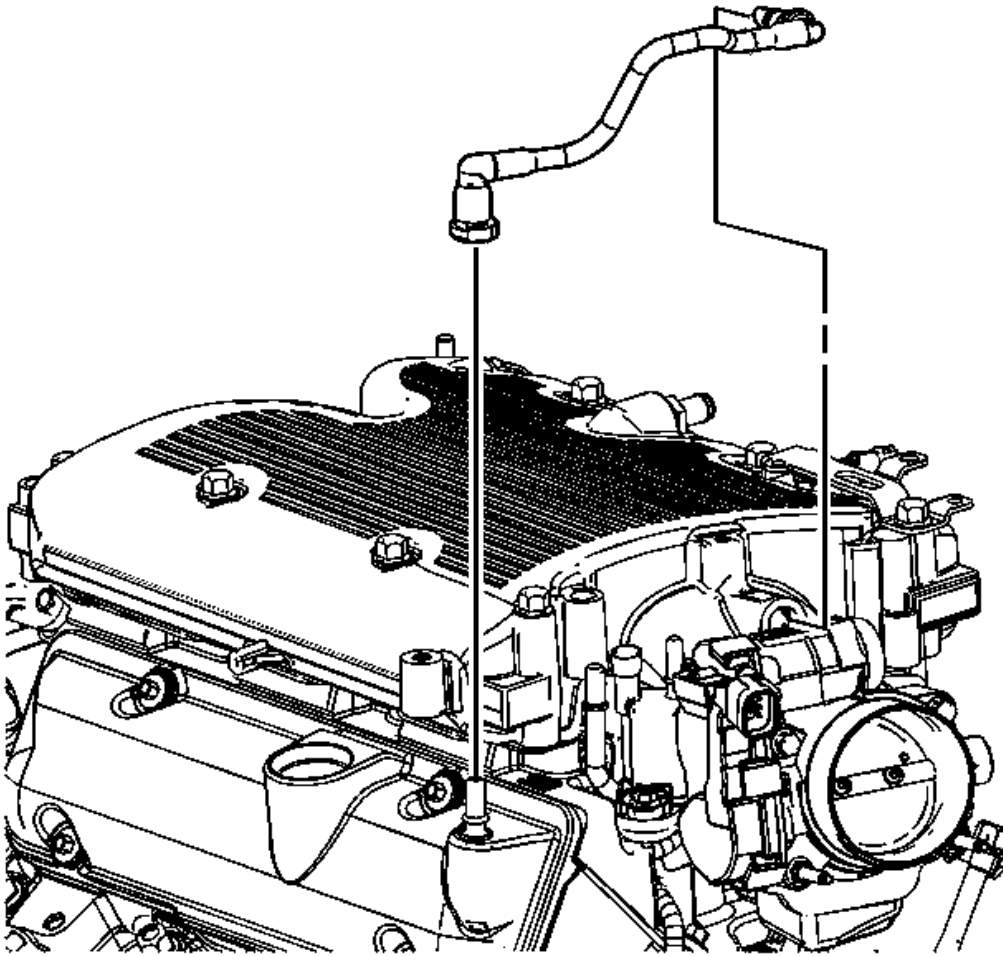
Identifying Crankcase Ventilation (PCV) Tube
